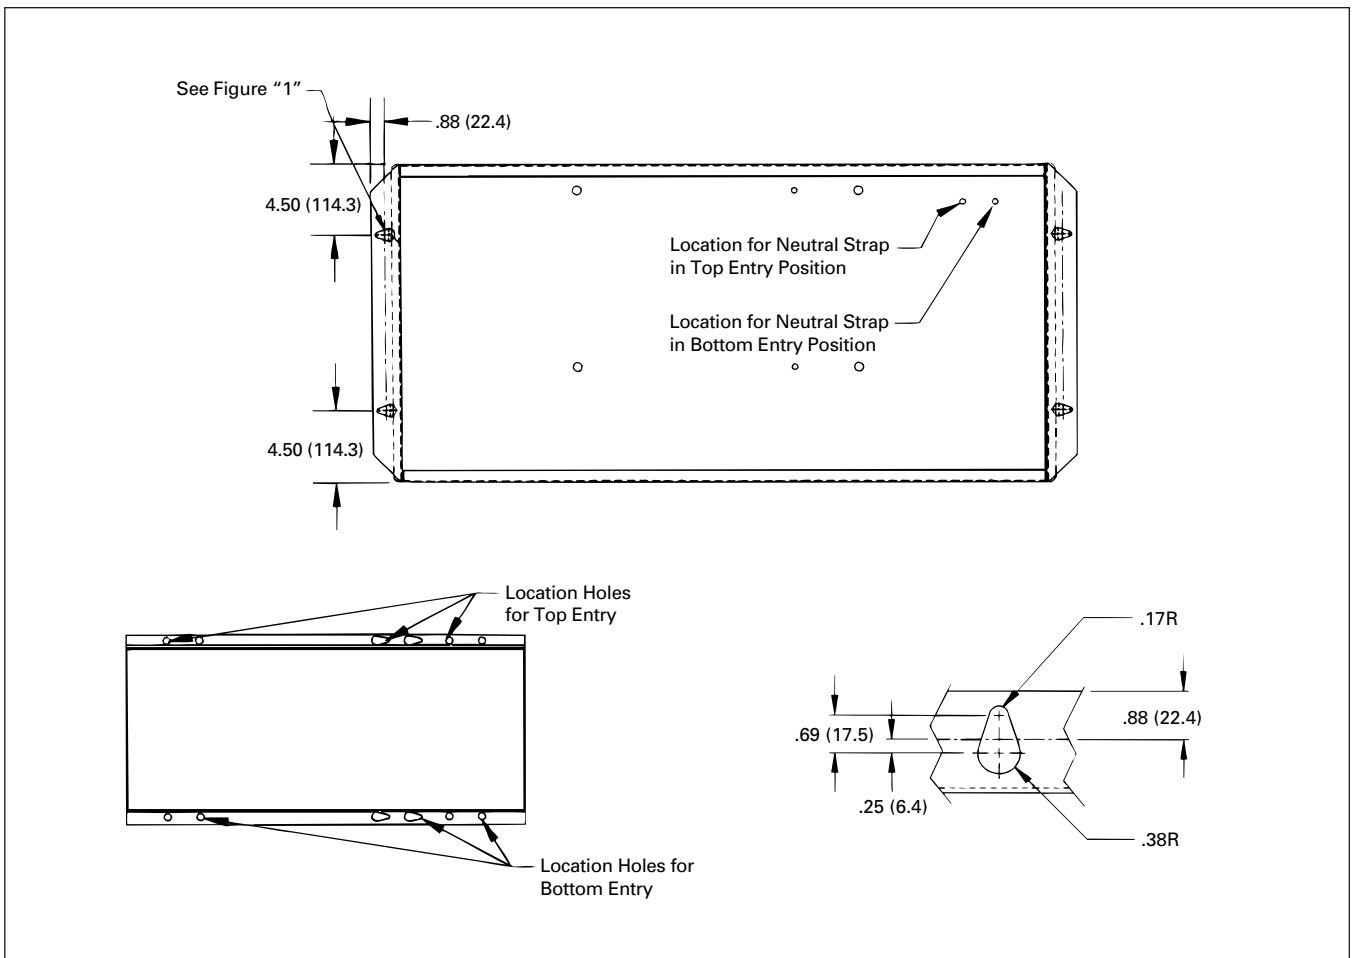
Vertical Design Power Panel Mounting Reference in Inches (mm)
